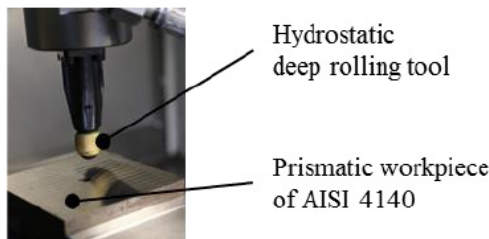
Experimental setup for deep rolling of prismatic workpieces.
